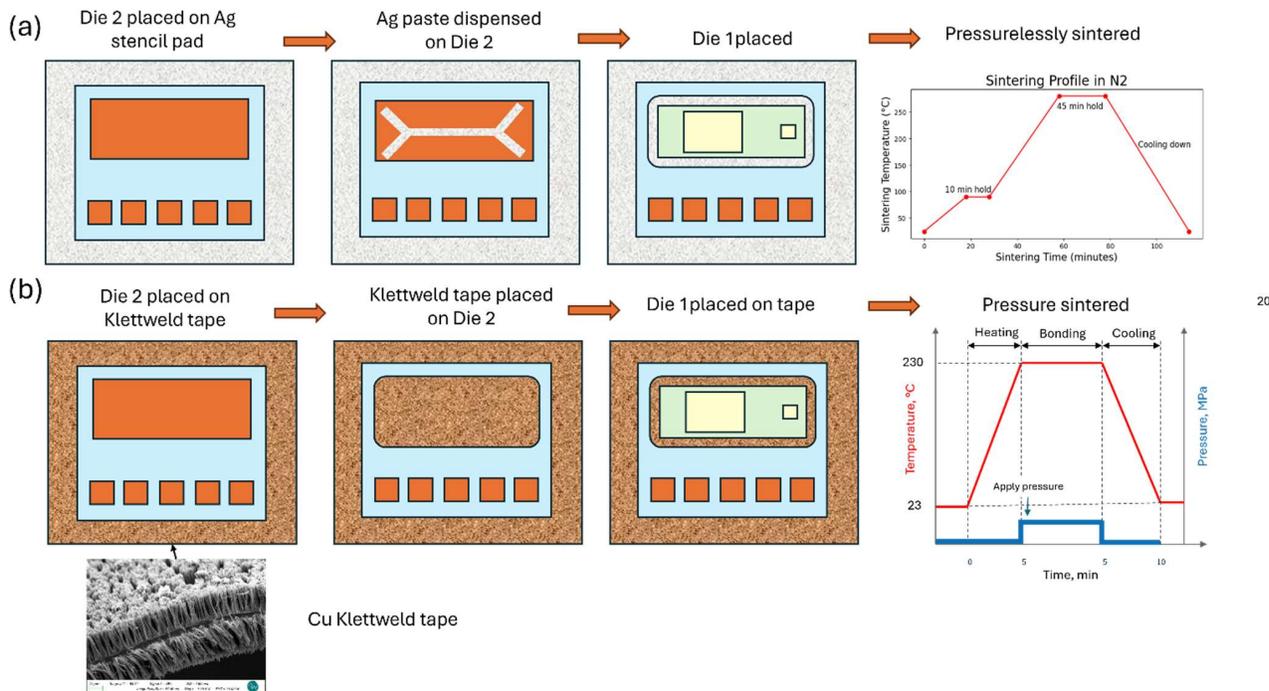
(a) Assembly overview for single-step Ag paste sintered die stack system; (b) Assembly overview for single-step Klettsintered die stack system.
